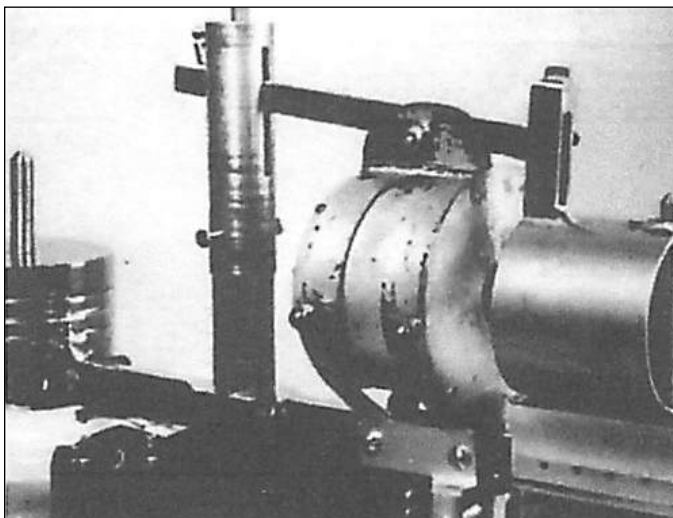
A. Centrifuge modification of a dental casting machine with casting flask positioned to receive metal.
